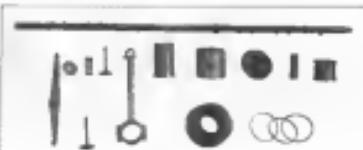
GROUP OF PARTS FOR THE SPURGEON BEARING
